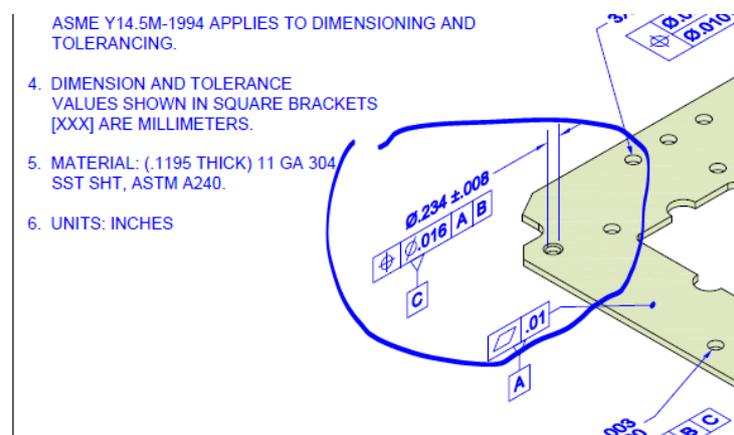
NIST Test Case FTC09, View A, Detail of Hole
